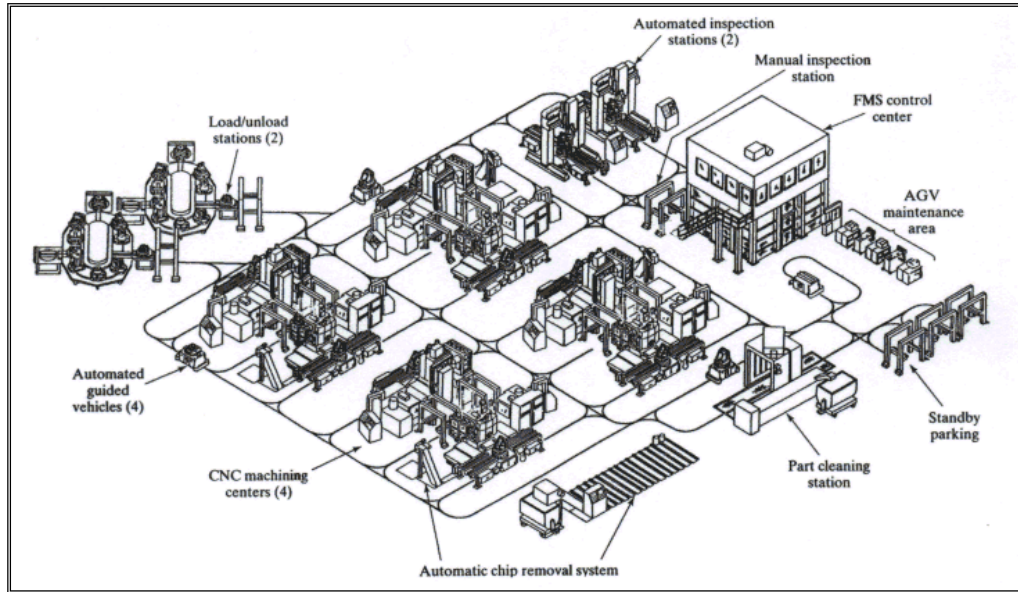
Flexible Manufacturing System Layout (Groover)
